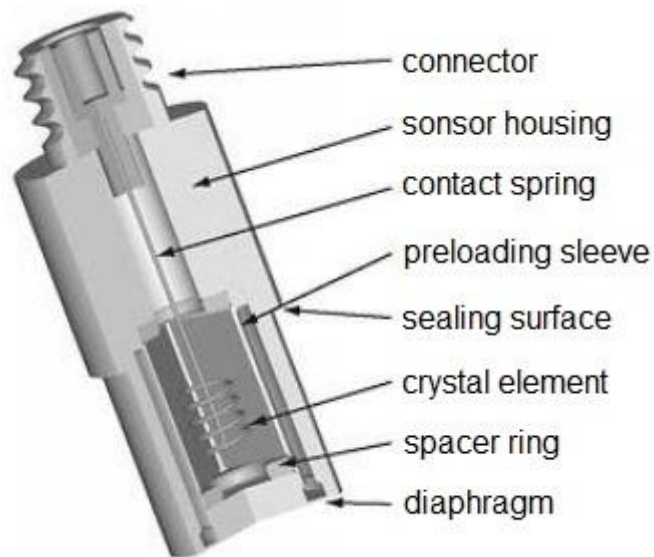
Basic design of a pressure sensor (Sommer and Engeler, 2005).
